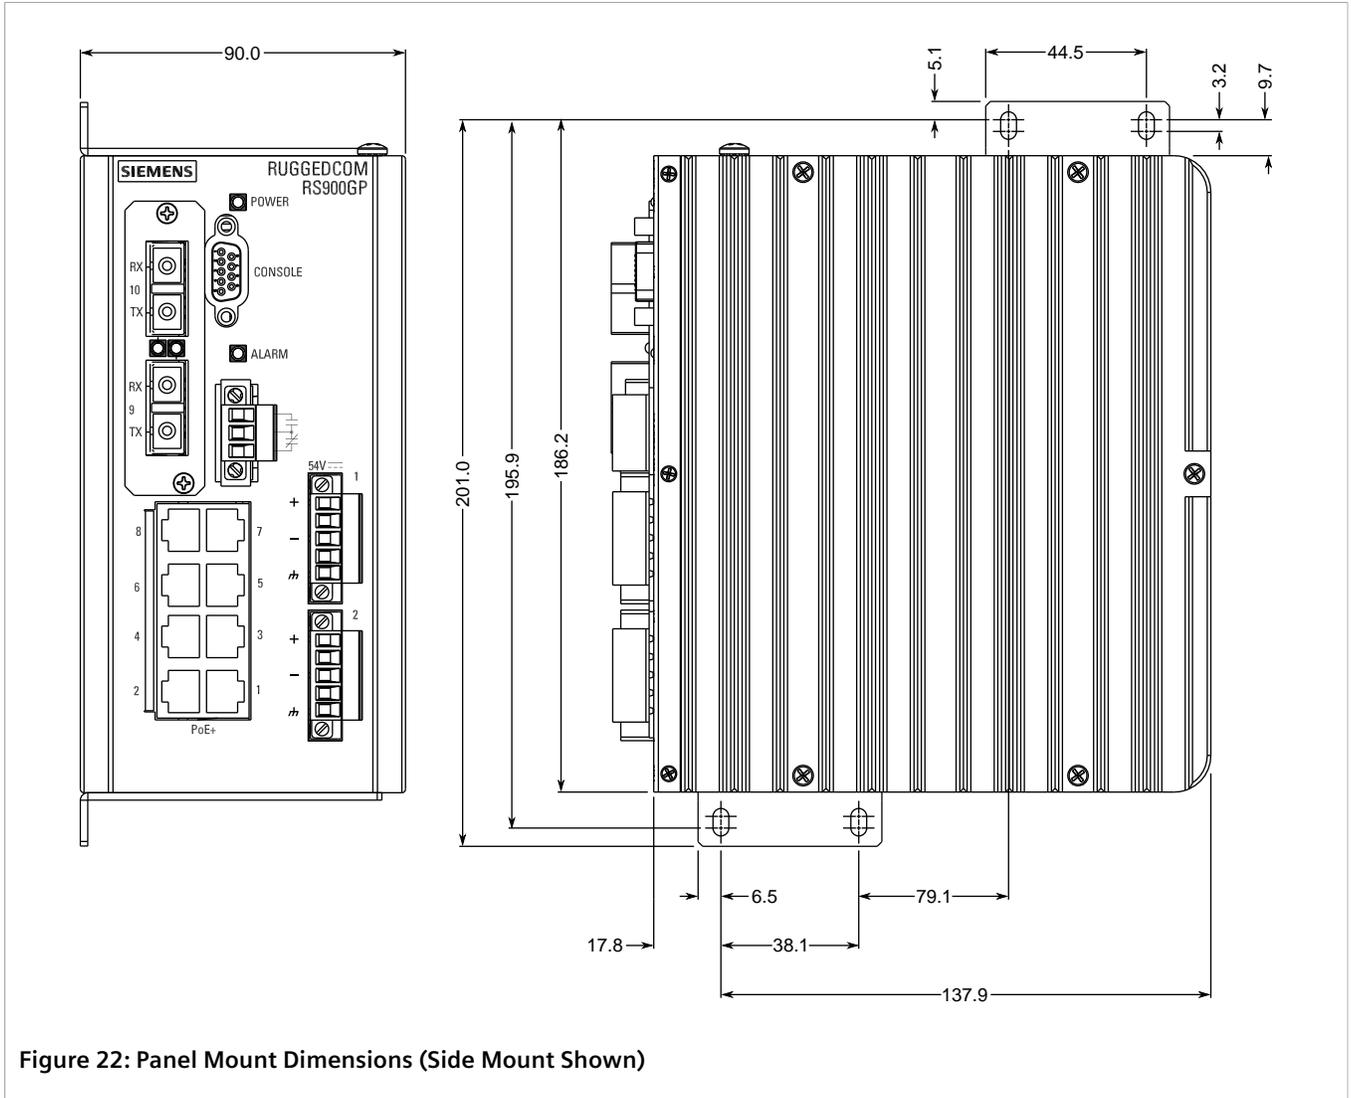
Panel Mount Dimensions (Side Mount Shown)
